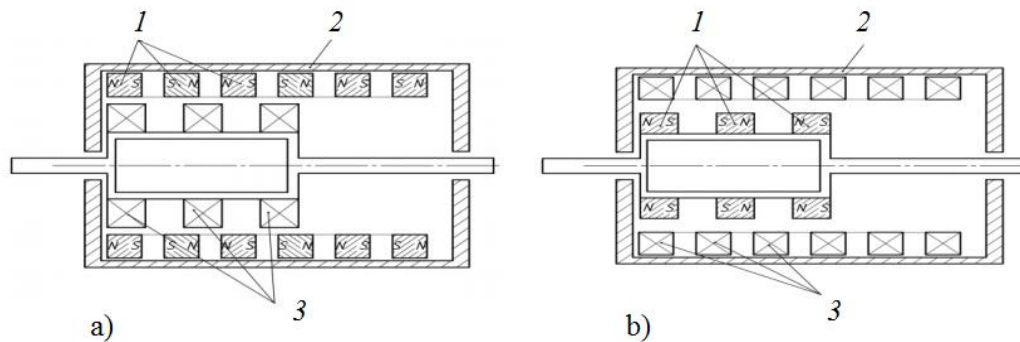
Possible designs of reciprocating electrical machines with permanent magnets 1 - permanent magnets; 2 - yoke; 3 - winding
